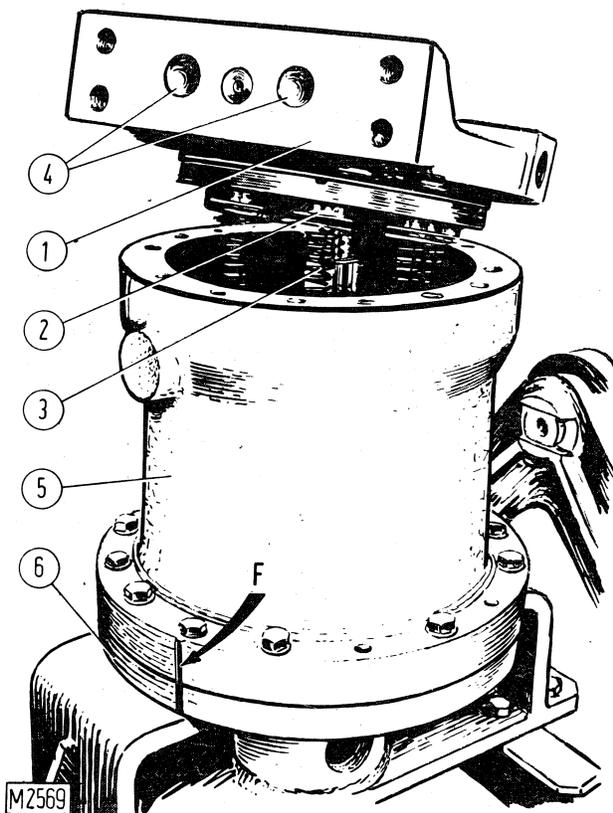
View of rear end plate (1) and timing plate (2).
